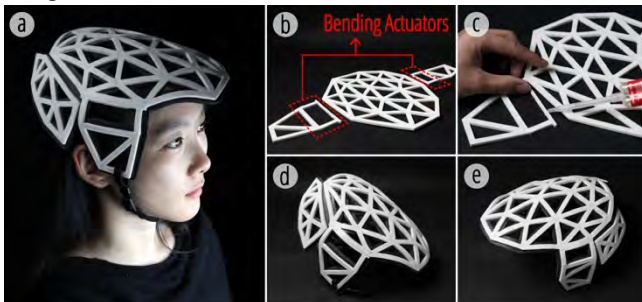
Aerodynamic helmet. (a, d, e) The triggered and assembled helmet; (b) The printed flat pieces; (c) The pre-assembling process.
